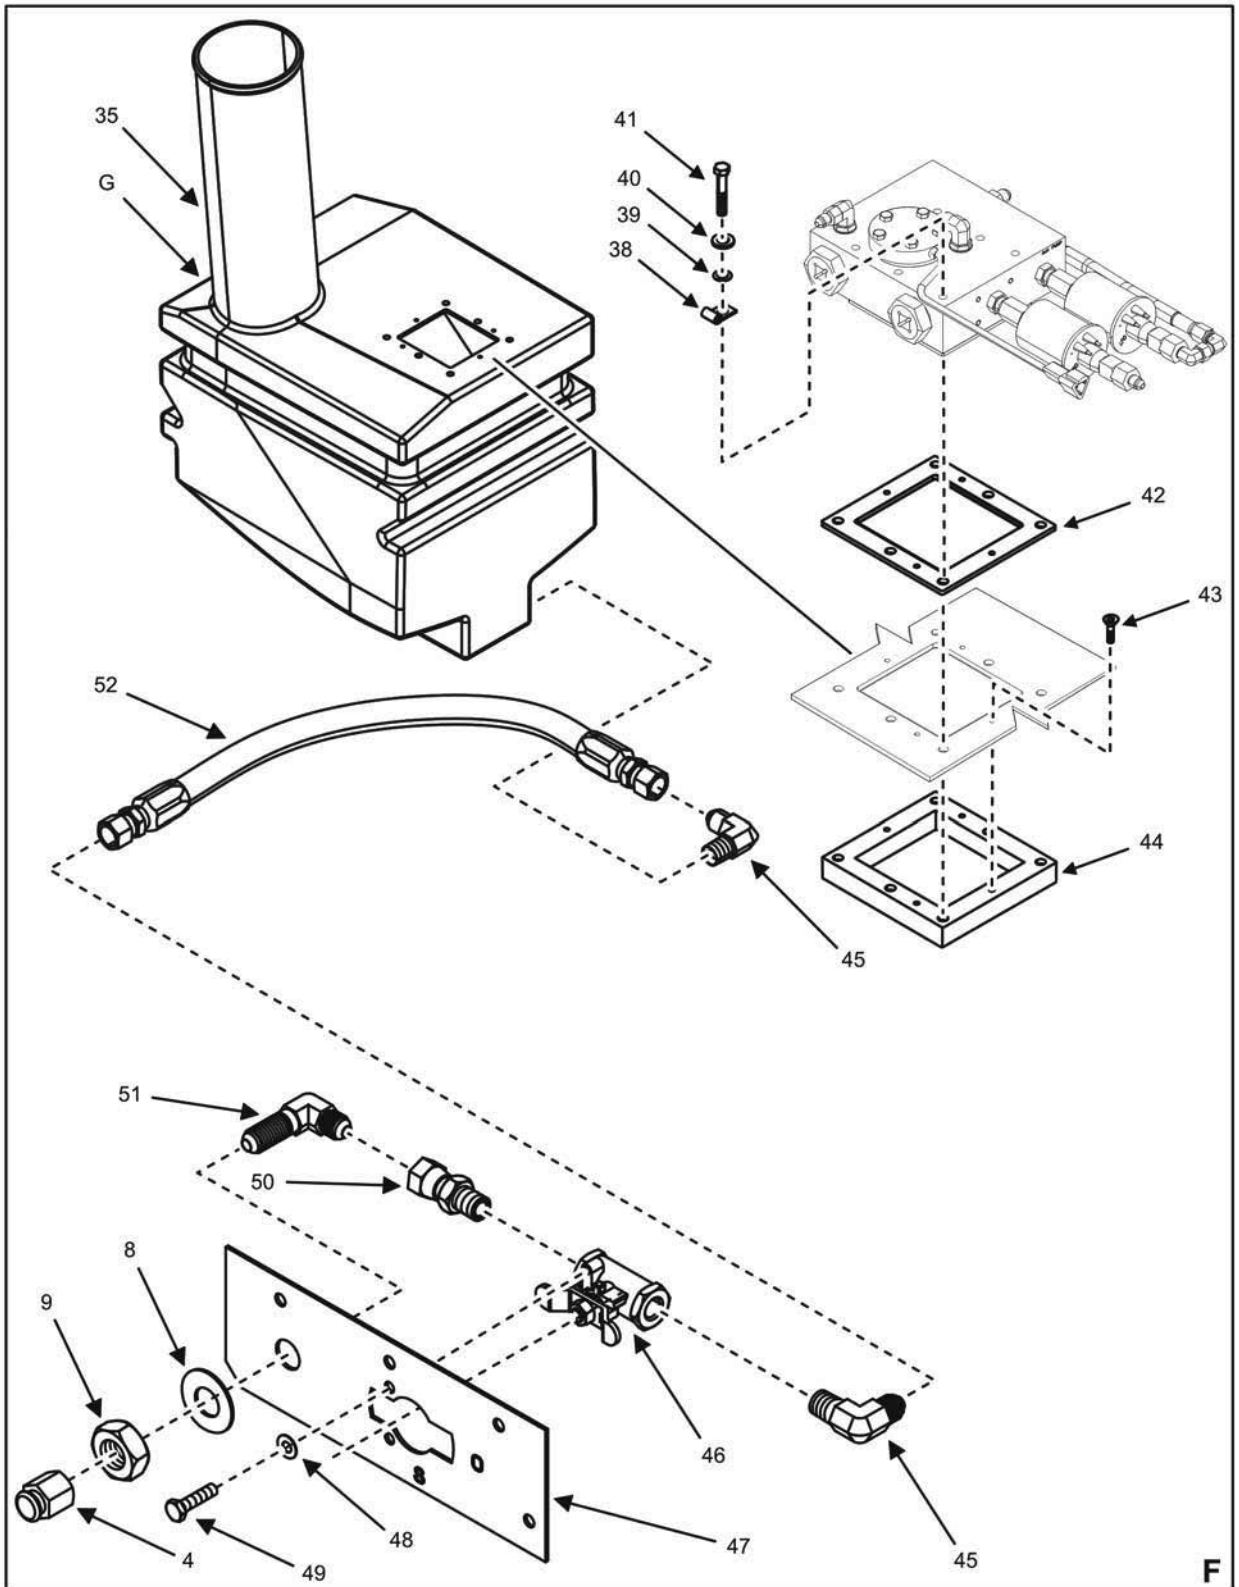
Fuel System Assembly (Sheet 5 of 6).
